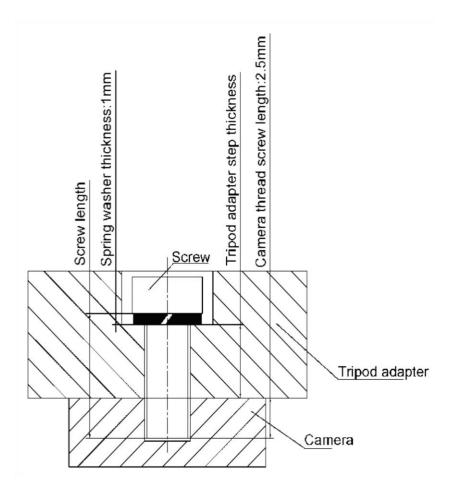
Schematic diagram of screw specification, tripod adapter step thickness and spring washer thickness
